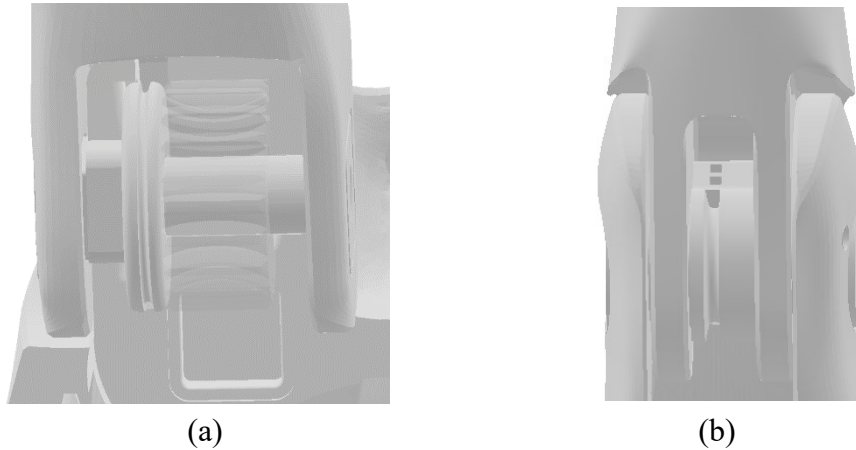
Configuration of the (a) MCP shaft and (b) PIP shaft
